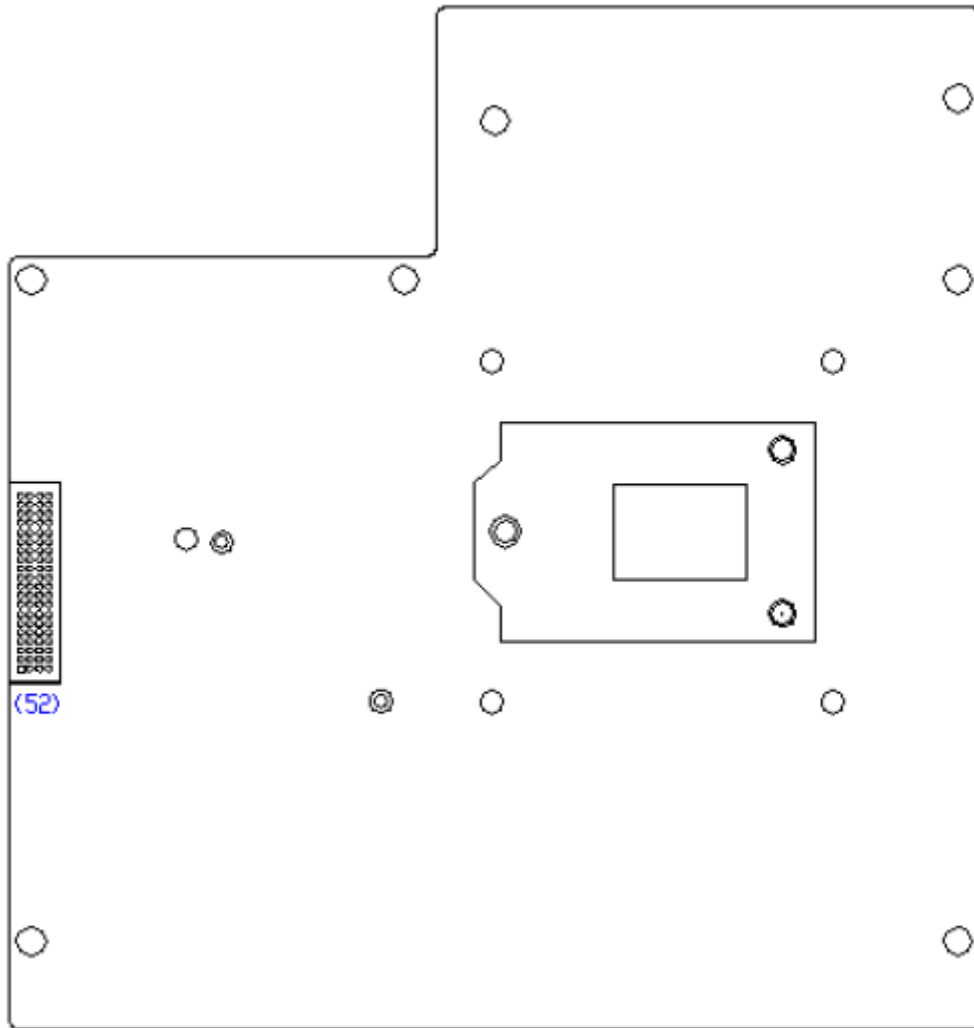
Jumpers and Connectors Location- Board Bottom
